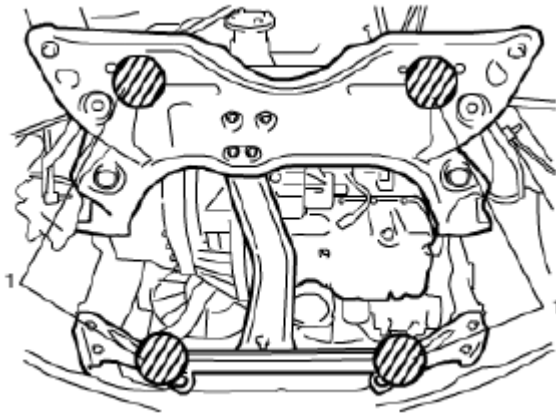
Supporting Front Suspension Frame & Front Lower Cross Member
